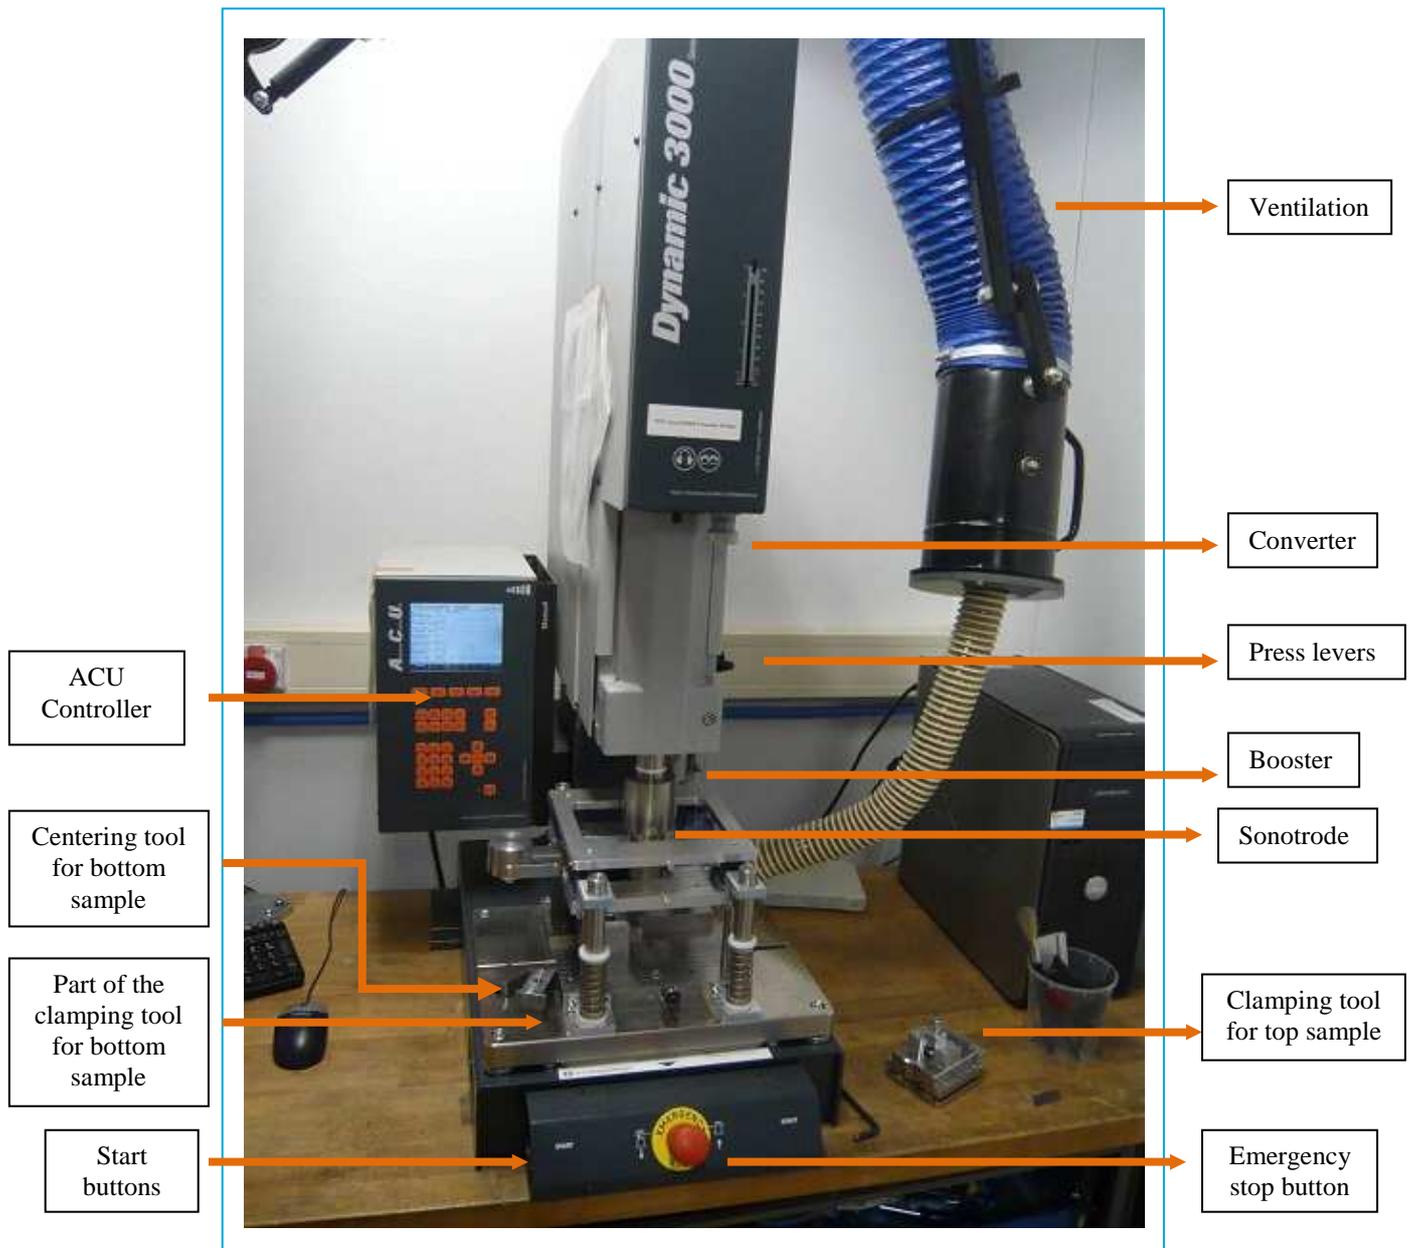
Ultrasonic Welding Machine, ACU Dynamic 3000 (Rinco Ultrasonic AG)
